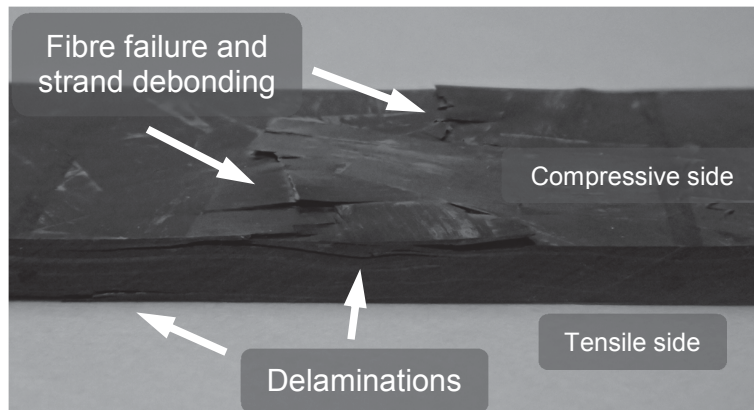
Flexural test specimen showing delamination on the edges, as well as fibre failure and strand debonding at the surface.
